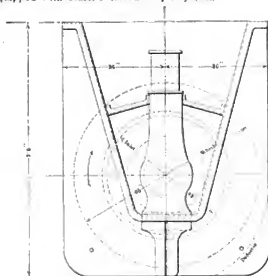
FIRE-ROOM BLOWERS FOR UNITED STATES CRUISER CHICAGO; 66-INCH FAN WITH DOUBLE ENGINE.
